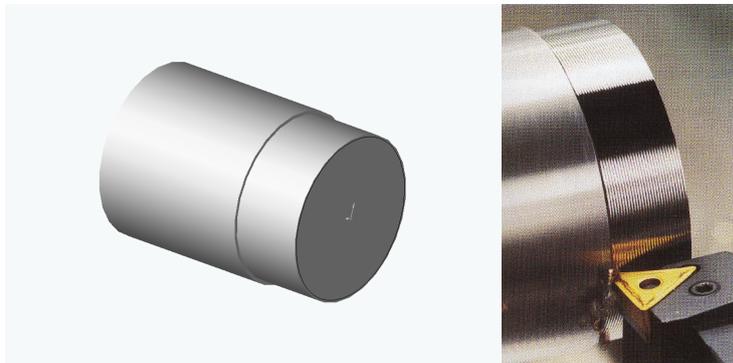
Stage 3: Turning the threads for the assembly of the cover.
